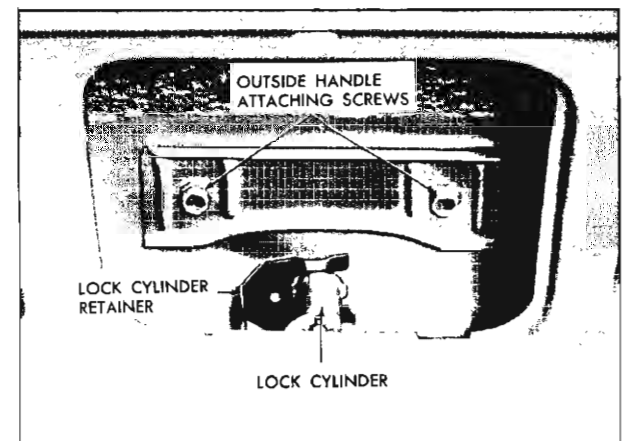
Back Door Outside Handle and Lock Cylinder Attachments
